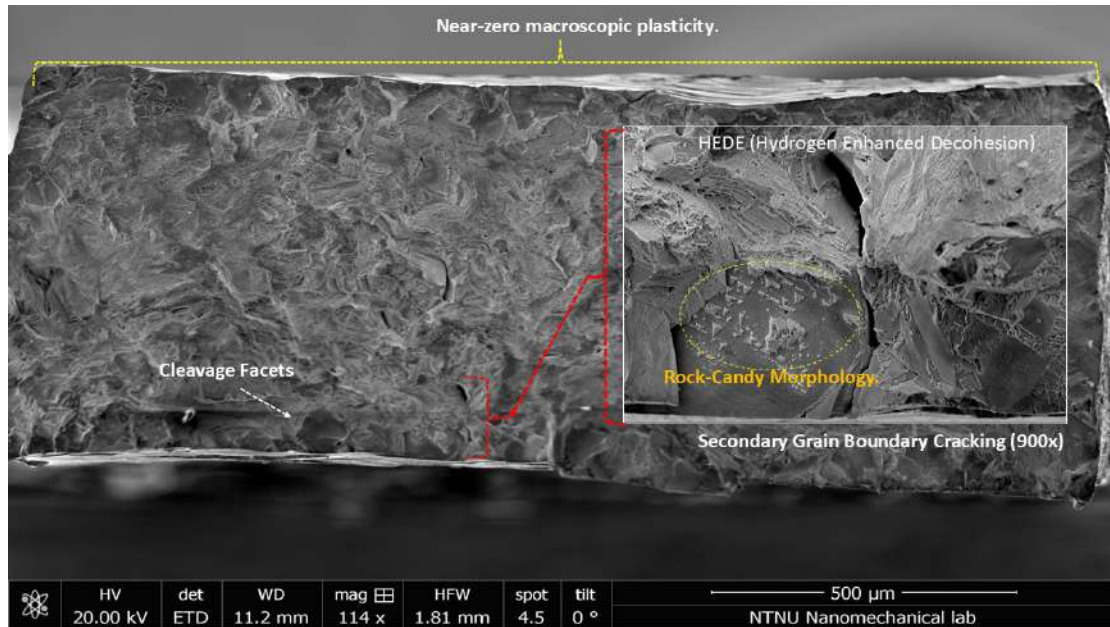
Overview of the 72 h fracture cross-section showing an essentially un-necked profile and a macroscopically flat, brittle fracture surface.
